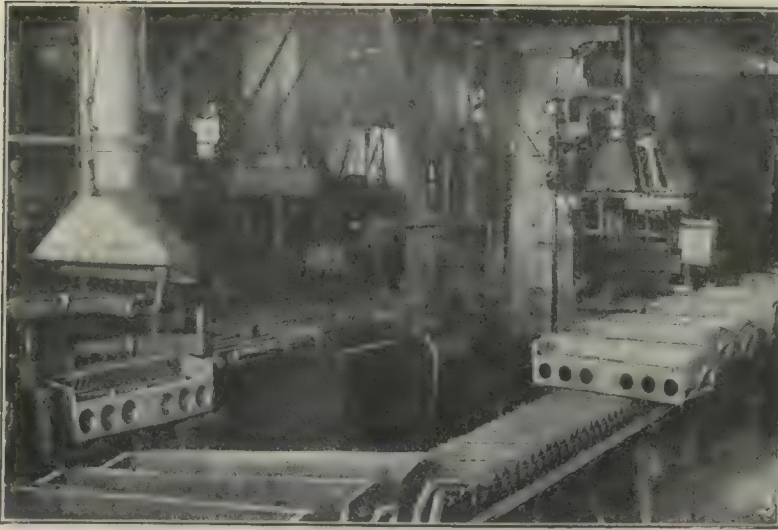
MULTIPLE MACHINE DRILLING BOLT HOLES IN FLANGE
